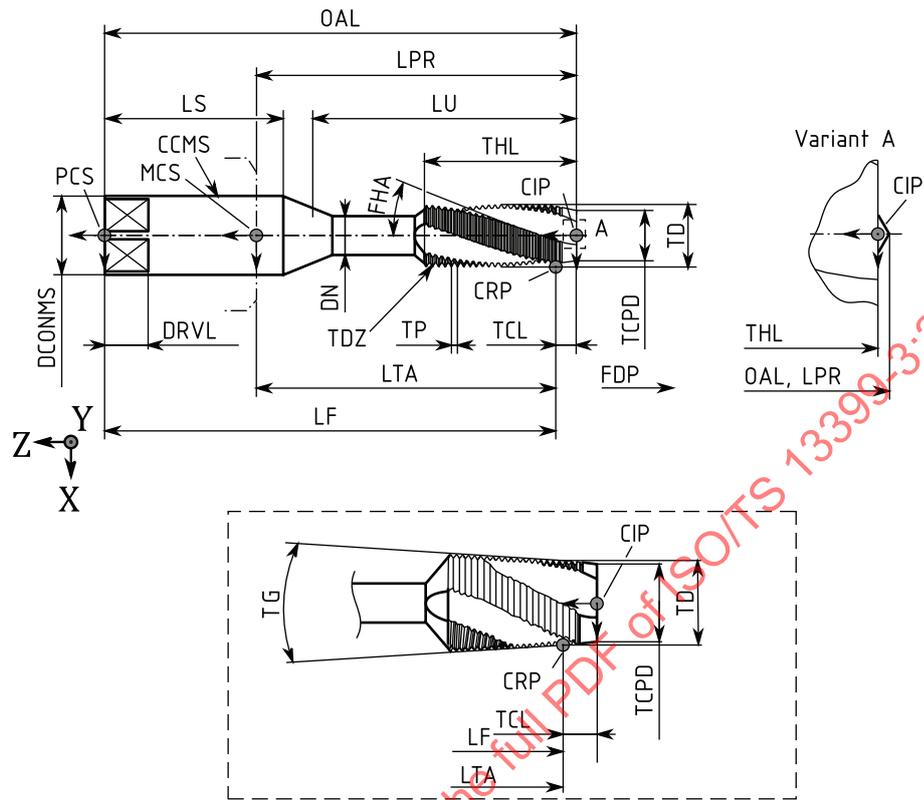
ISYC 301-02 - Thread cutting tap with cylindrical shank and drive key, with neck
